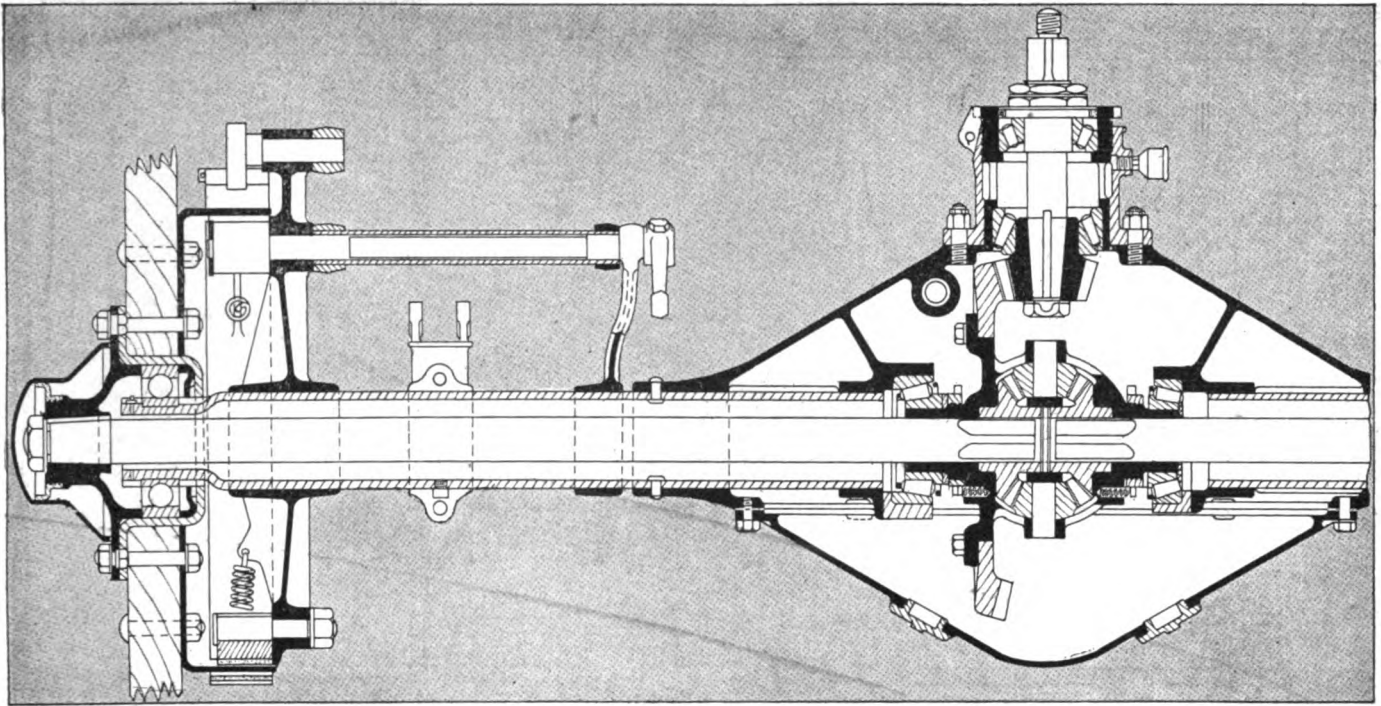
View of rear axle on Abbott 1913 cars, showing differential brakes and wheel bearings
